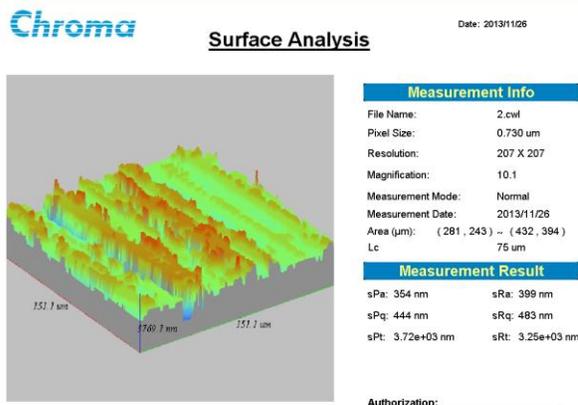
(b) Ground surface of MIM AISI 316L workpiece of 2nd experiment under L9
